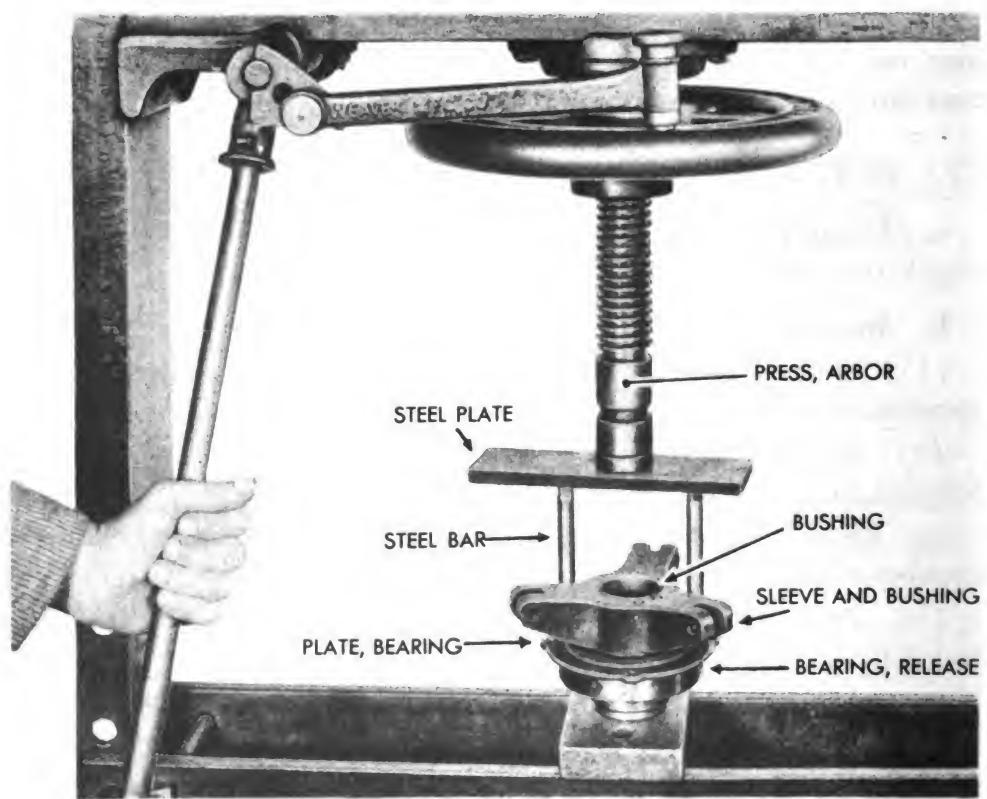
Pressing Release Bearing from Sleeve and Bushing
